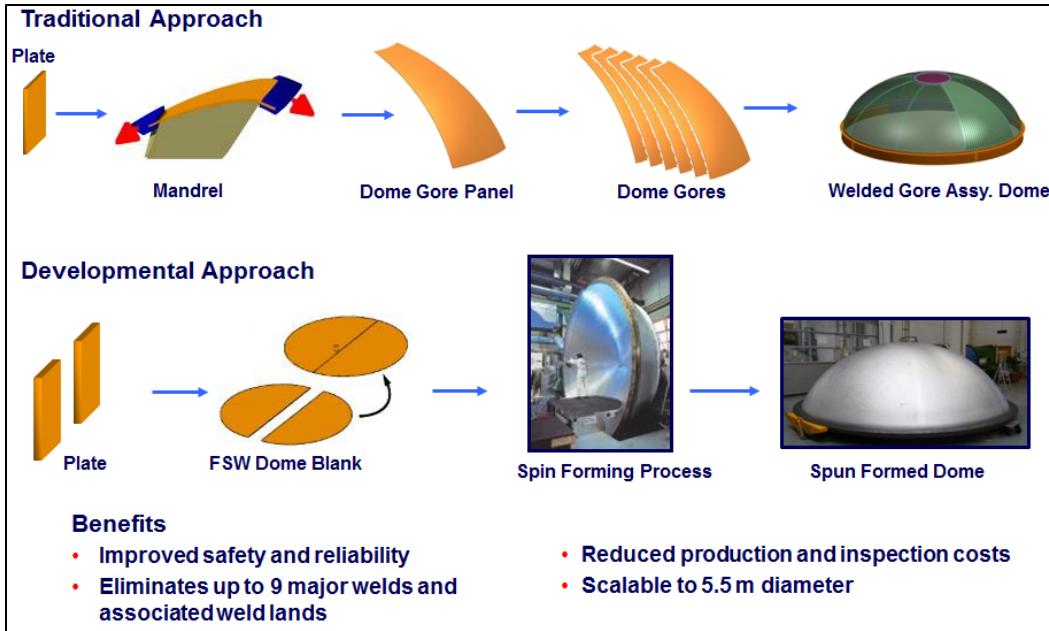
Cryogenic Tank Dome Manufacturing: Multi-Piece Welded Gore Construction vs. Spin Forming (Alloy 2195).
